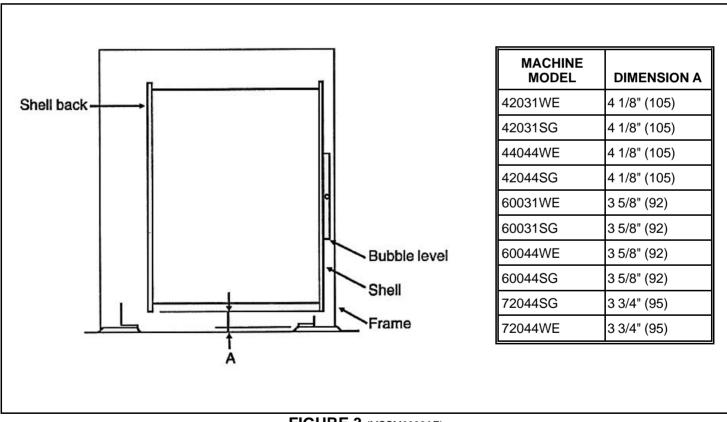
(MSSM0302AE) Shell Hanging Dimensions for Divided Cylinder Machines (Left side view of 60044WE shown)
